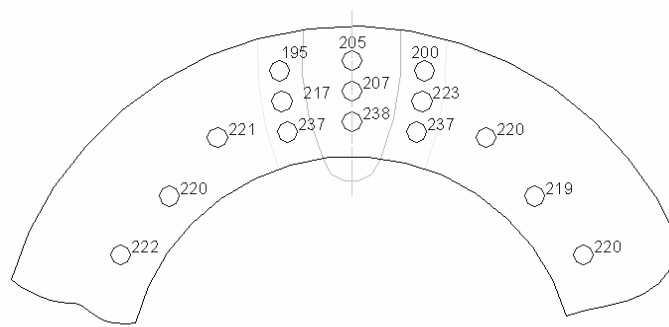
Hardness distribution HV 10 on the section of welding cold forming shape $\varnothing 273 \times 6,35$ mm of L360MB in the welding zone
